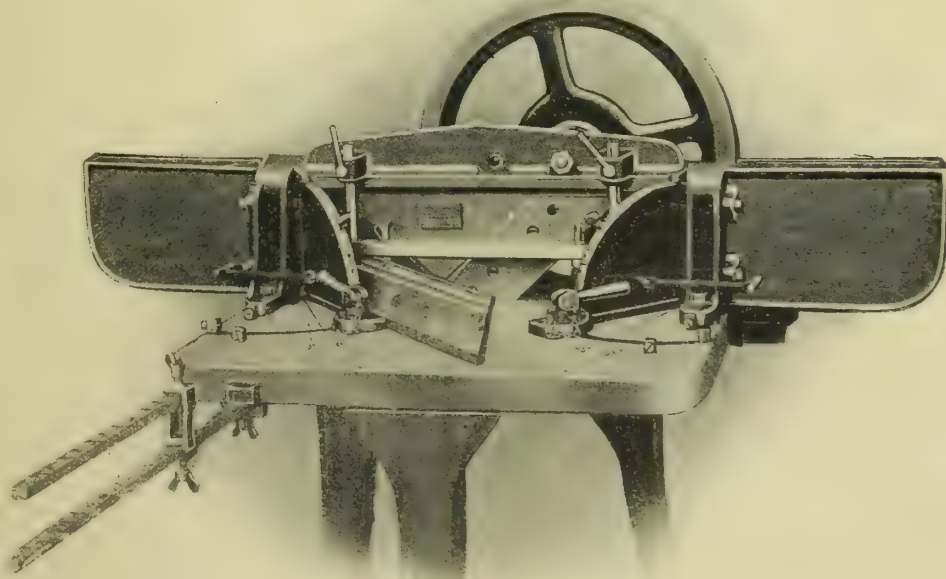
THE MASTERPIECE WOOD TRIMMER. MESSRS. JOSEPH HOLLIS & CO., LEICESTER.
